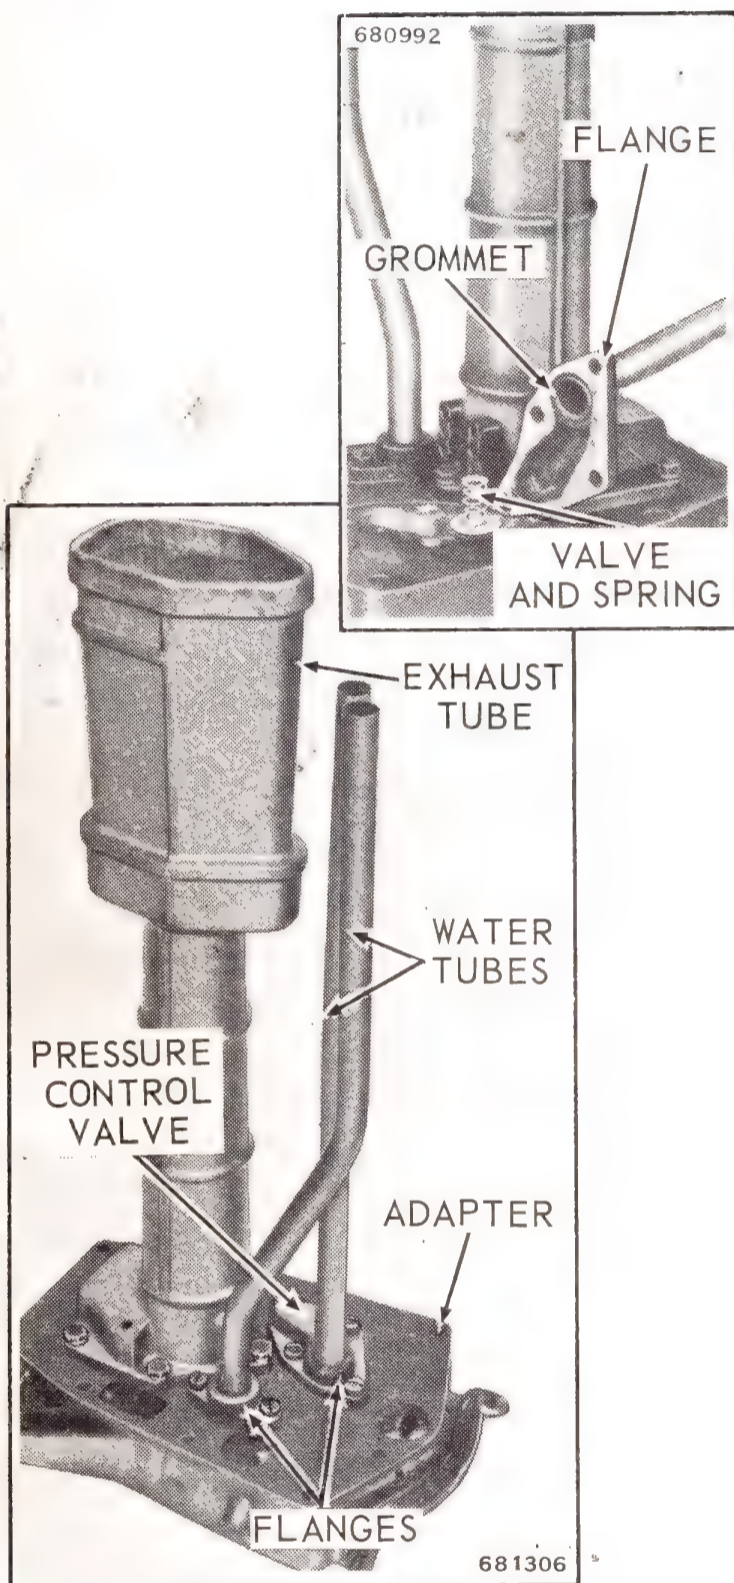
Inner Exhaust Tube, Water Tubes and Adapter
